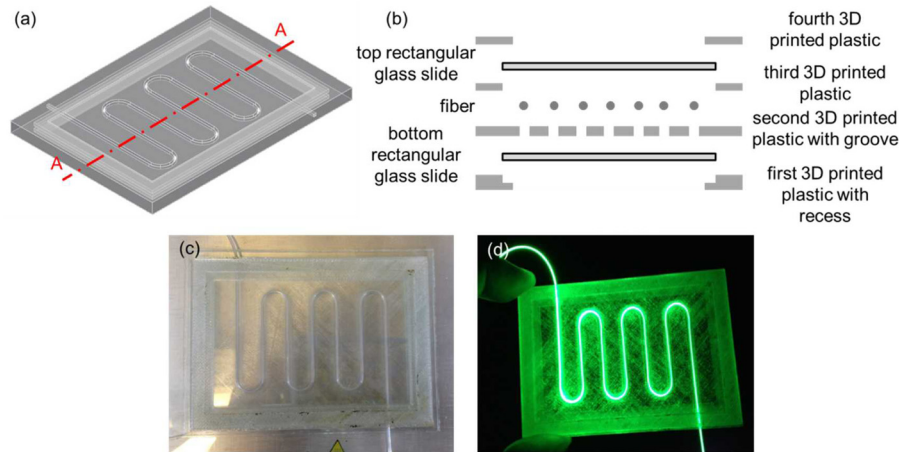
(a) 3D CAD model of the second optical device without the fiber, and the top and the bottom rectangular glass slides. (b) Schematic diagram of the exploded cross-sectional view of Section A–A depicted in (a) with the fiber, and the top and the bottom rectangular glass slides. (c) The second 3D printed optical device with embedded Corning® Fibrance™ Light-Diffusing Fiber, and the integrated top and bottom 75 mm × 50 mm and 0.96 mm to 1.06 mm thick rectangular glass slides. (d) The device was lit up using a green laser pointer.
